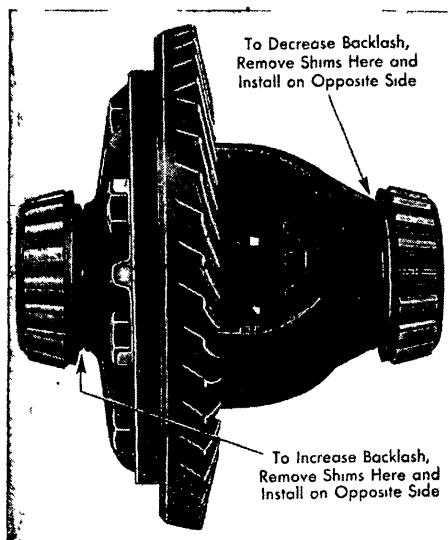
Method of correcting backlash between ring gear and pinion on shim-adjusted units
